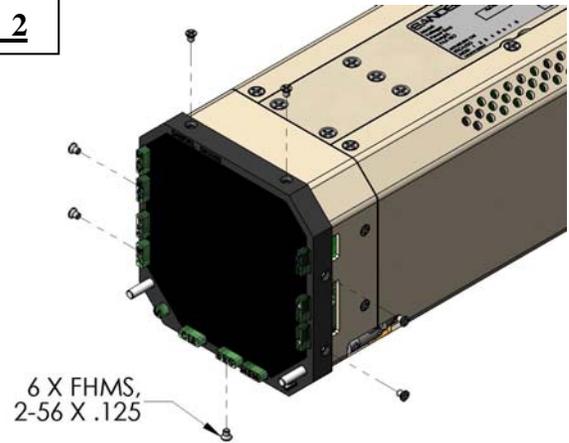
Remove 6 ea flat head machine screws, 2-56 X .125 retaining bezel to actuator housing. Hold bezel in place to prevent shifting of retained components.
